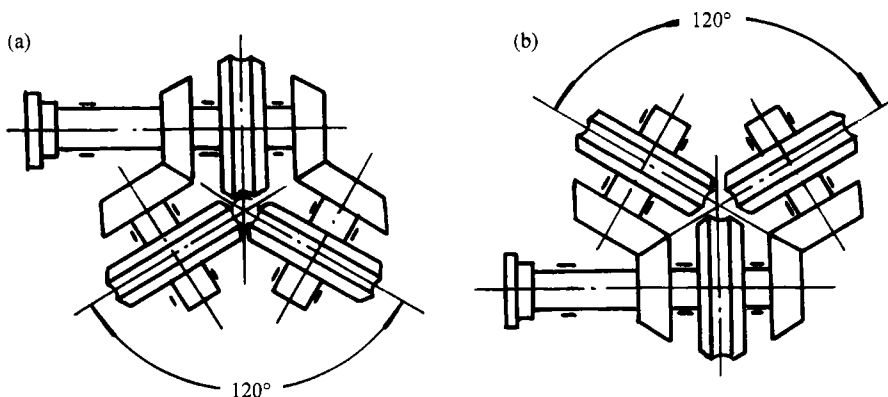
Roll arrangement of the 3-roll mill. (a) The upper drive stand, (b) the lower drive stand.
